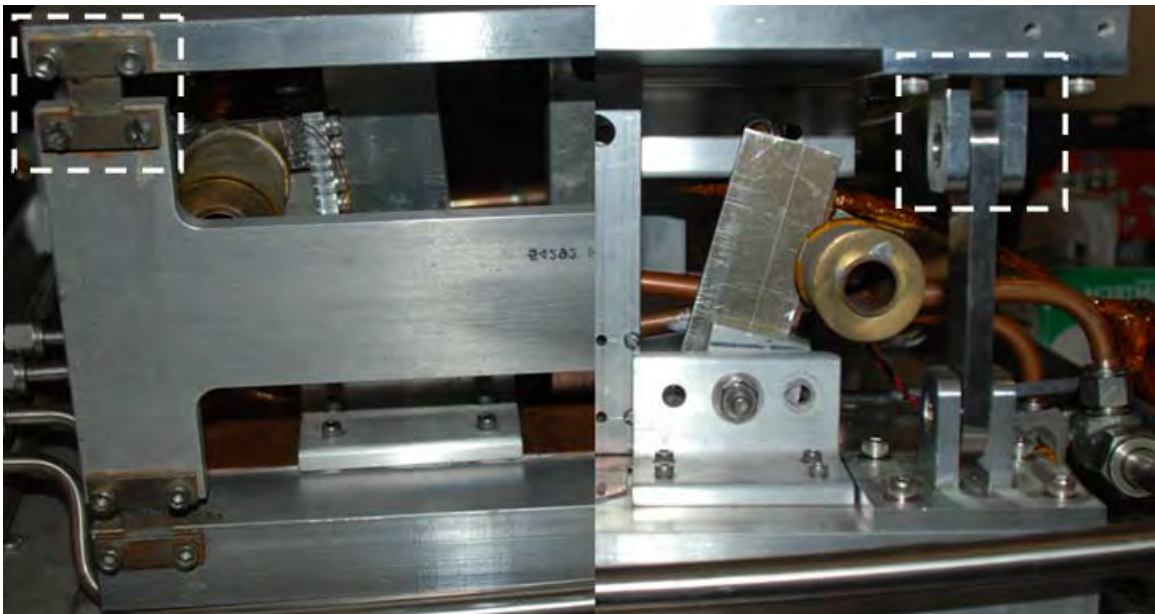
Thrust stand pre-modification support structure with flexures (left) and post-modification with torsional bearing structure (right). A flexure and torsional bearing assembly are highlighted by a white dashed box in their respective images.
